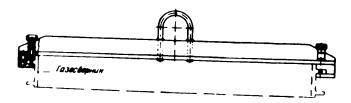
Fixture for Lifting Nozzle Inlet Ducting
